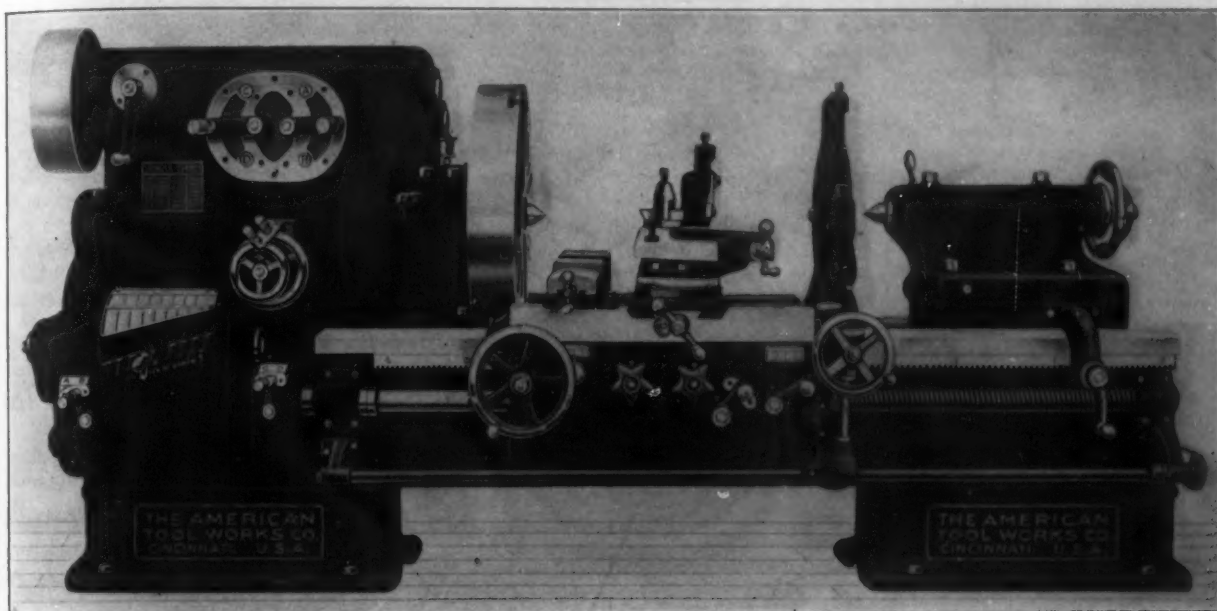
The 30-In. High-Duty Lathe with Belt Drive and 12-Speed Head, Built by the American Tool Works Company, Cincinnati.
